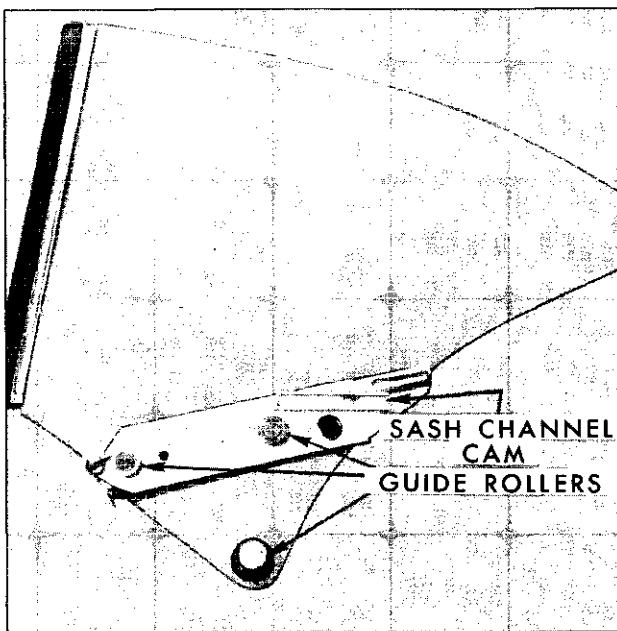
Rear Quarter Window Assembly "A - 37, 67 & 87" Styles
